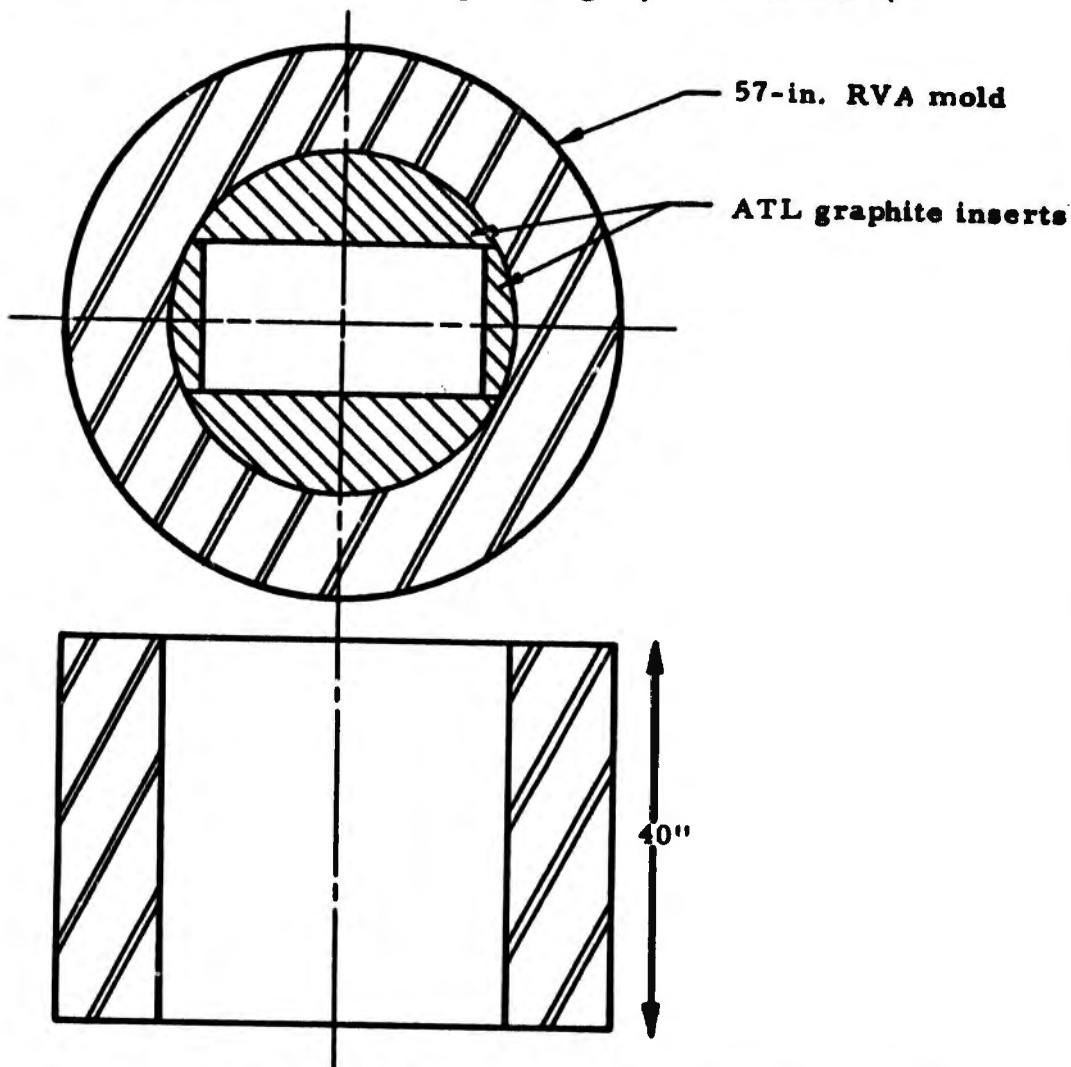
Hot-Pressing Mold for 30-in. by 15-in. Rectangular JTA Plates.
